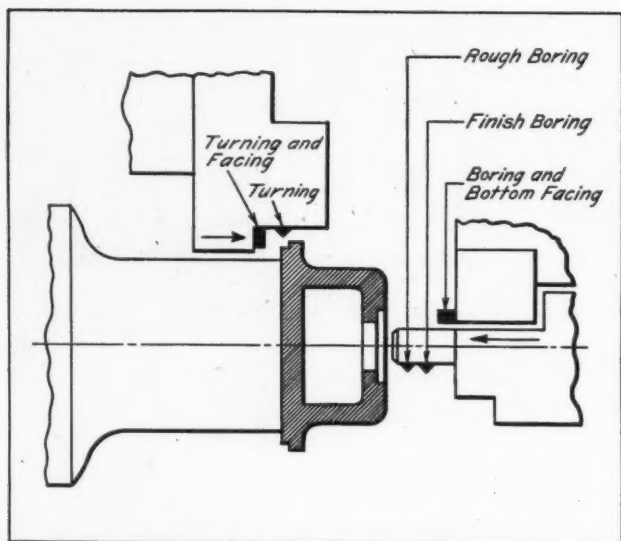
Diagrammatic View of Tooling and Operations Performed in the Set-up Shown in Fig. 10
